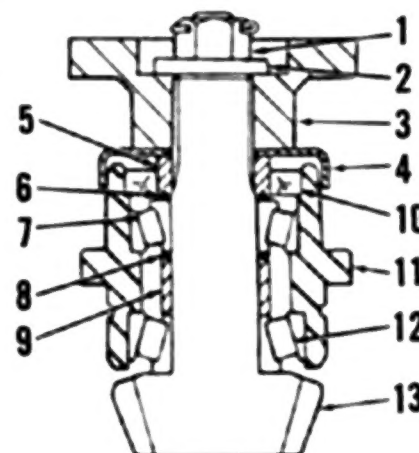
Sectional view of bevel drive pinion and bearing assembly.
